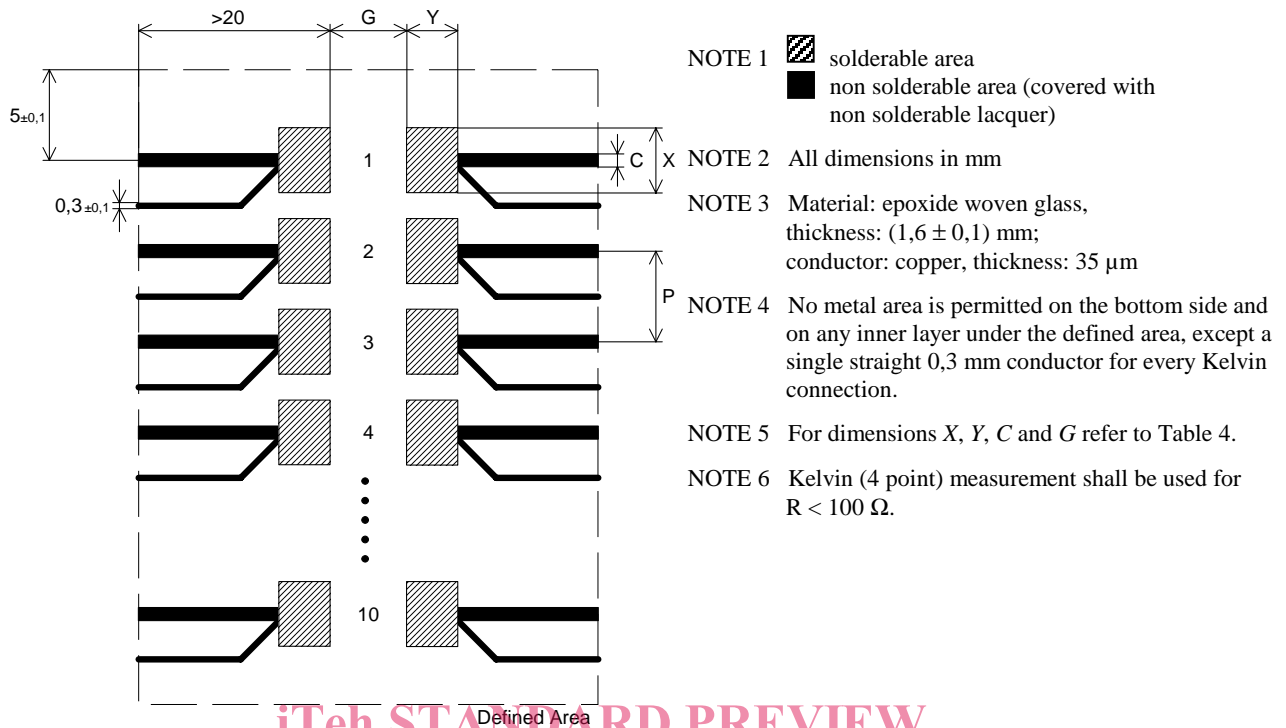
Basic layout for mechanical, environmental and electrical tests
